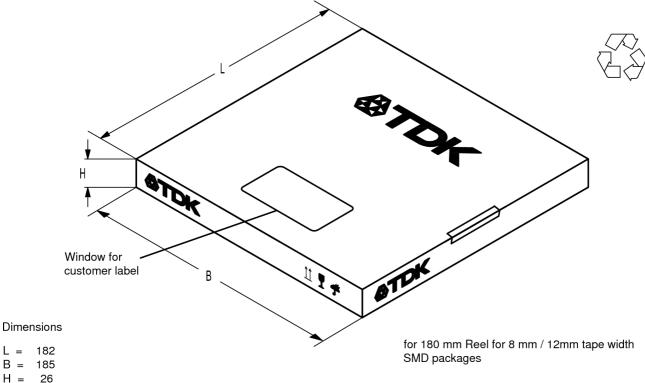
Drawing of folding box for reel with diameter of 180 mm.
